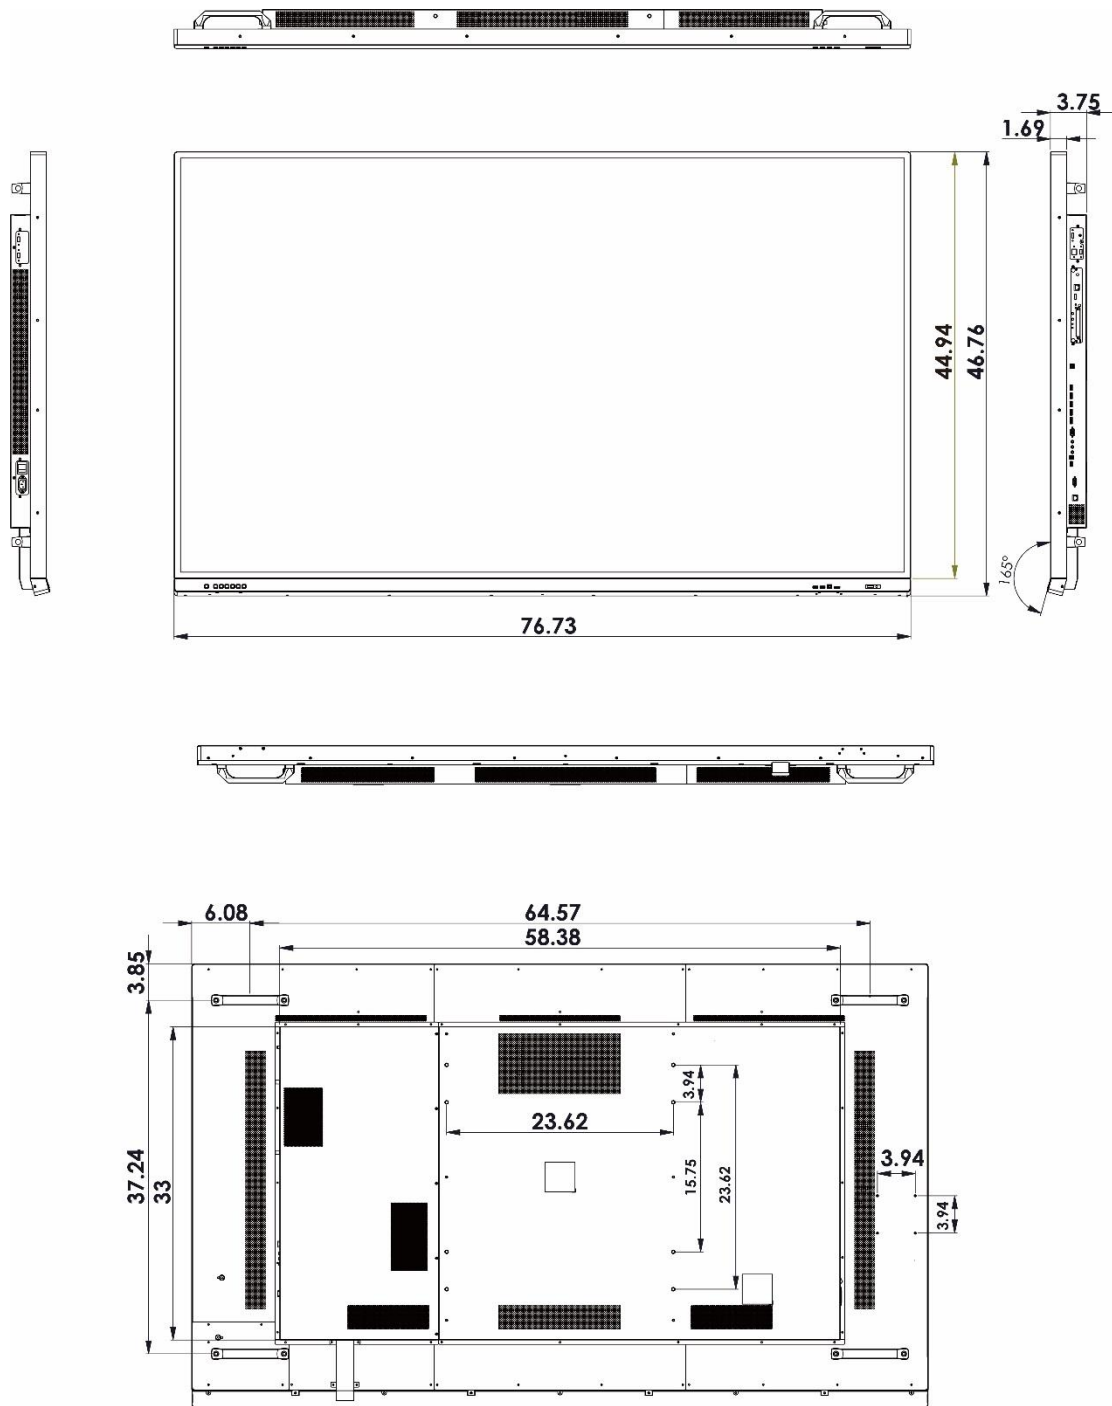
shows the display dimensions of AVF-7515 (all dimensions are in inches).
